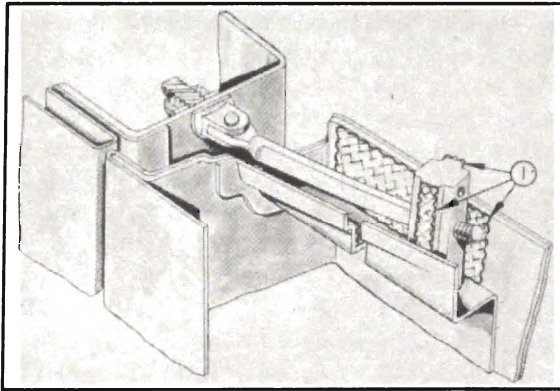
Cut-away view of front door check. Lubricate as indicated by arrows.
